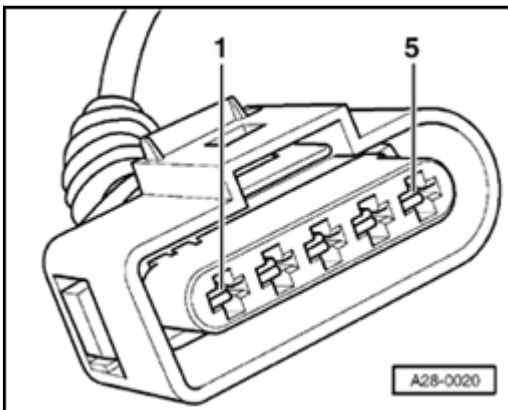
Identifying Engine Control Module (ECM) 5-pin Connector Terminals 1 & 5
